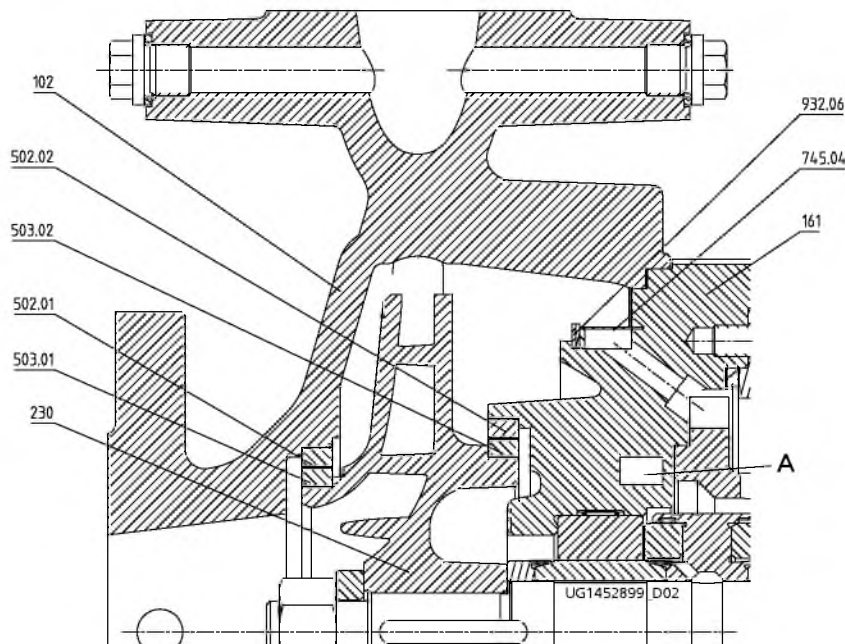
Model with volute casing and ring filter, heating chamber, casing wear ring and impeller wear ring
